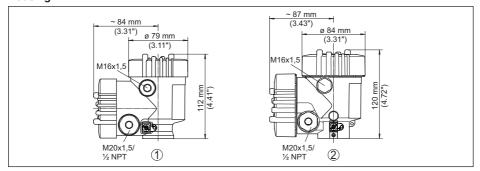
Dimensions of housing (with integrated display and adjustment module the housing is 9 mm/0.35 inches or 18 mm/0.71 in higher)
